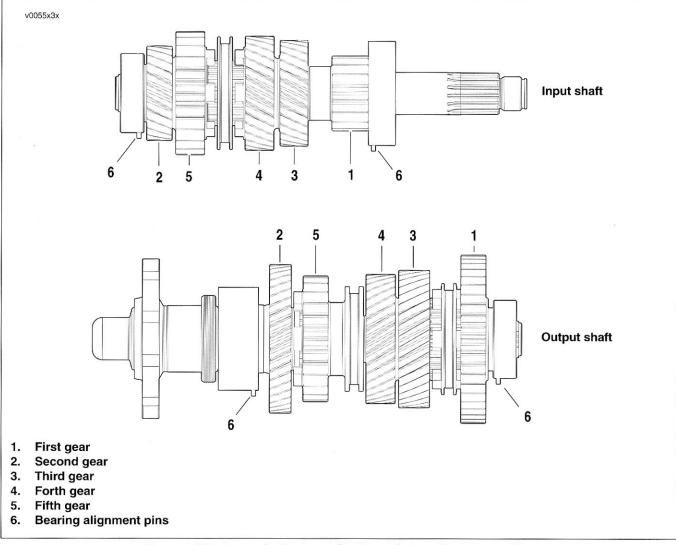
Transmission Input Shaft and Output Shaft Assemblies
